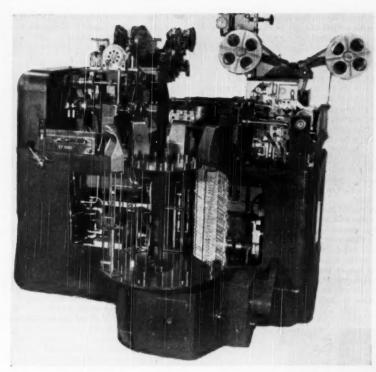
AUTOMATIC MACHINE FOR WINDING GENERATOR-ARMATURE COILS
